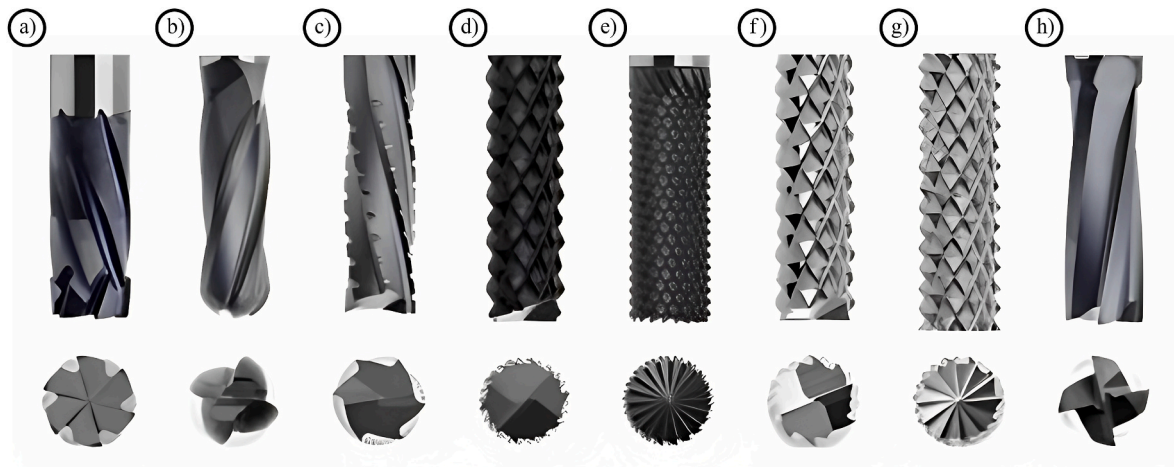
Representative advanced tool designs for the edge trimming of CFRP composites: (a) coated multi-flute dual helix end mill (also known as compression end mill), (b) coated multi-flute ball nose end mill, (c) coated multi-flute down cut helical end mill with chip breakers, (d) coated coarse honeycomb mill, (e) coated fine honeycomb router, (f) uncoated coarse honeycomb mill, (g) uncoated coarse honeycomb router, (h) coated multi-flute down cut helical end mill; redrawn based on Ref. [213].
